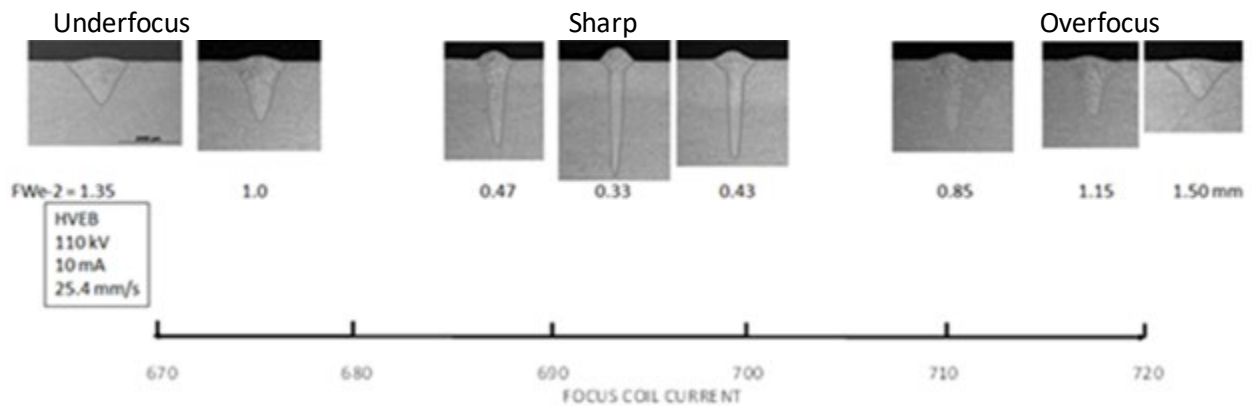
Data showing how weld depth of penetration depends on beam diameter (underfocus and overfocus) for EB welds in Type 304 stainless steel. Note: weld penetration at sharp is about 6 mm.
